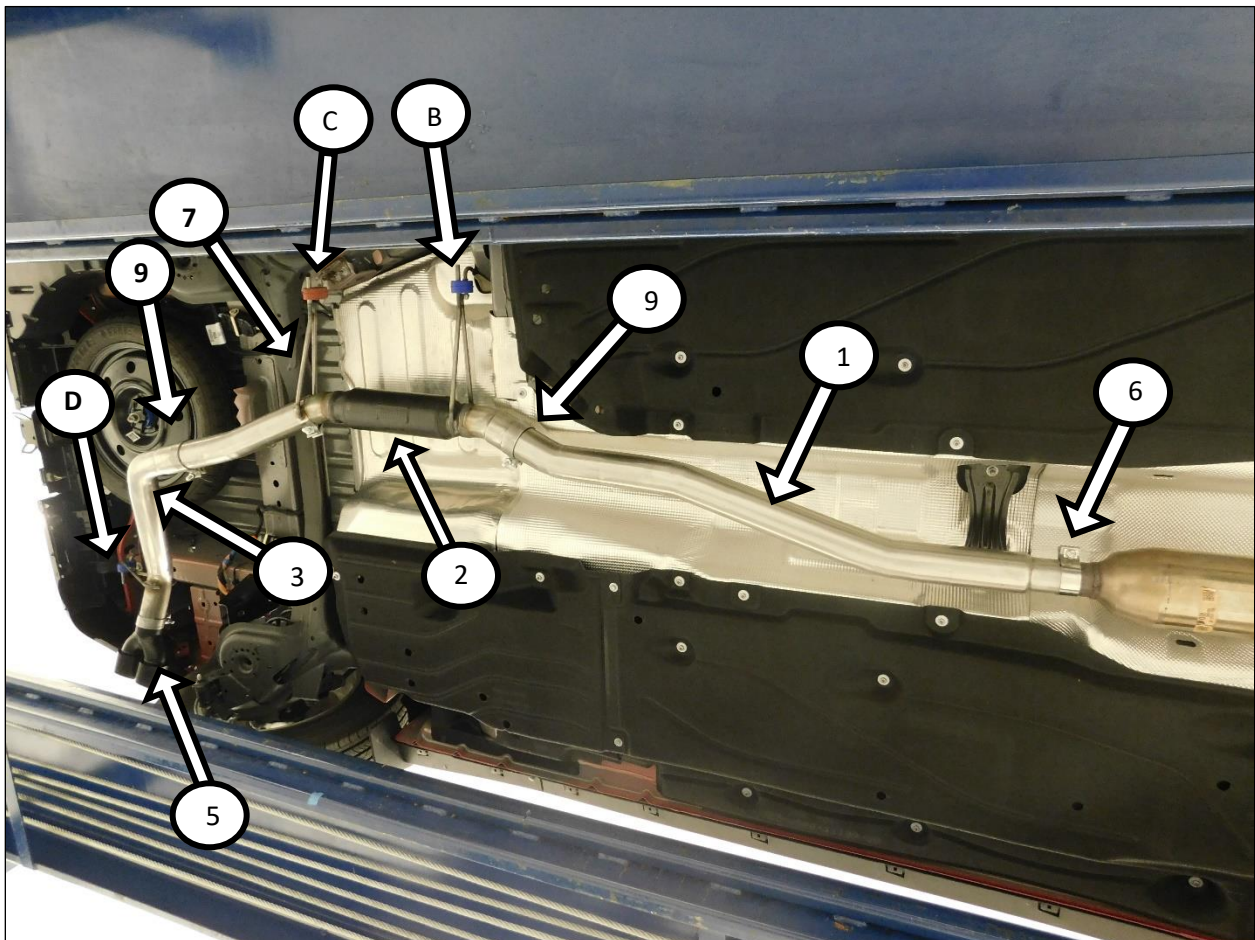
(Front Wheel Drive with Side Exit tailpipe shown)
